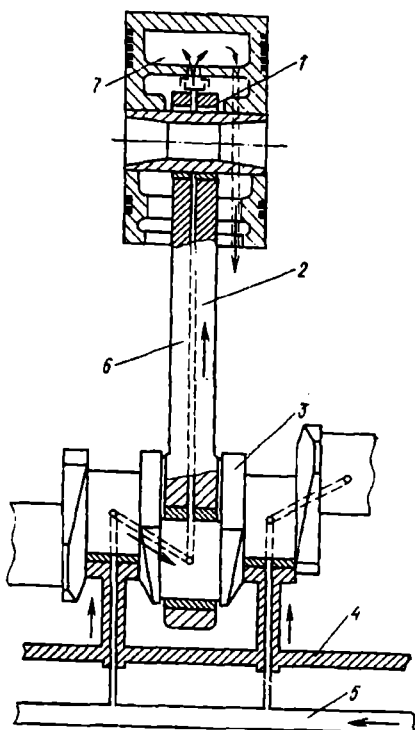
Schematic of oil passages used to lubricate connecting rod-crank mechanism
